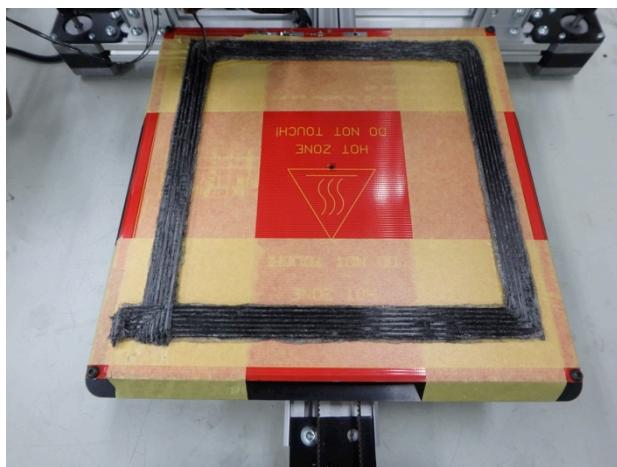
Specimen fabrication of CFRTPs by 3D printing. Four specimens were sliced from the four sides.
